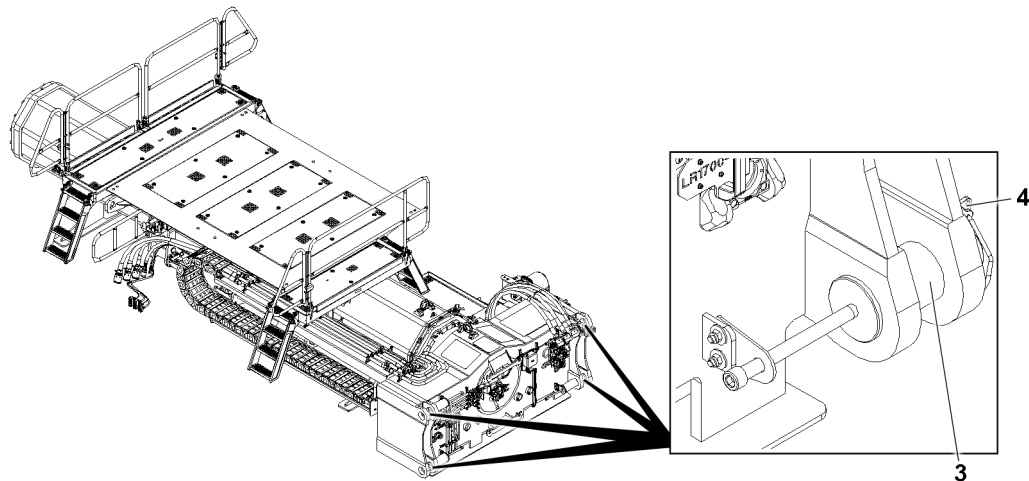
Disassembling the adapter from the ballast trailer guide or intermediate section – Securing the pins in the transport position
